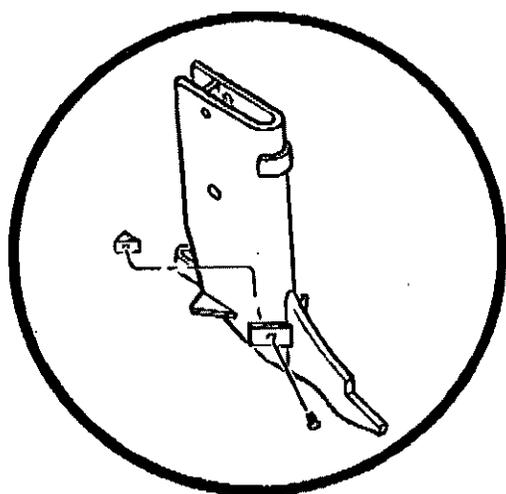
To install sod spreader wings, insert wing into hole provided in boot nose. Place reinforcement behind wing and bolt using 3/8" Allen head set screws. (There are two (2) wing reinforcements and set screws for each wing; one used on each side of boot.)
